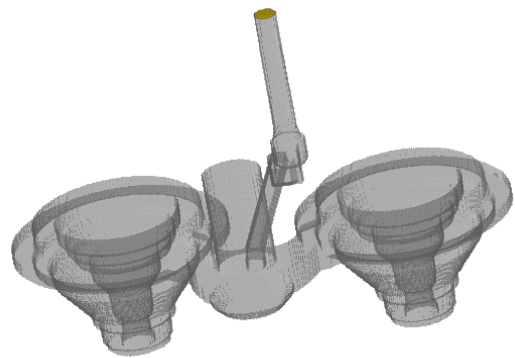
Solid Model of the existing gating system of the Brake Housing gating system (two cavity mould).
